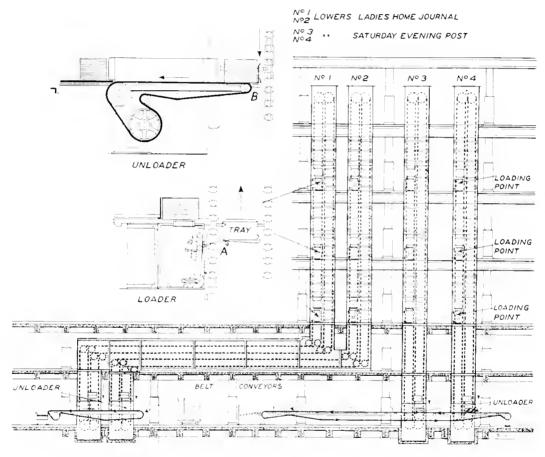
Diagram showing Arrangement of a Large Installation of Magazine Handling Conveyors, with Details of Loaders and Unloaders
